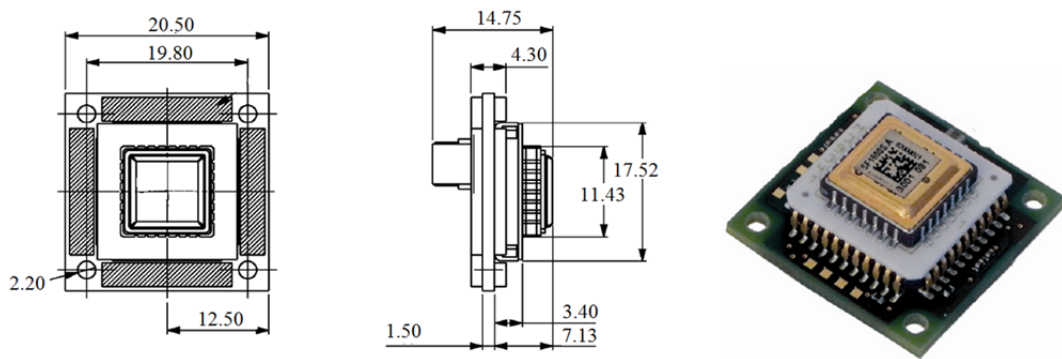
SF1600 dimensions and picture (source www.colibrys.ch [127])
